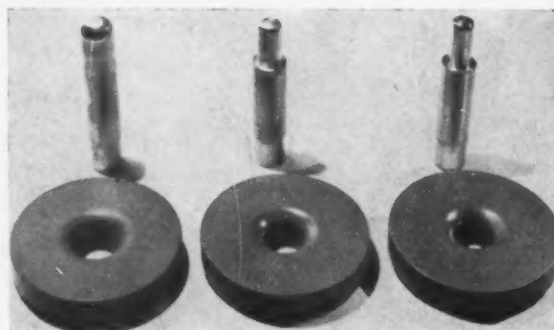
Three punches and dies used for second forming operation in Farquhar 50-ton press.
